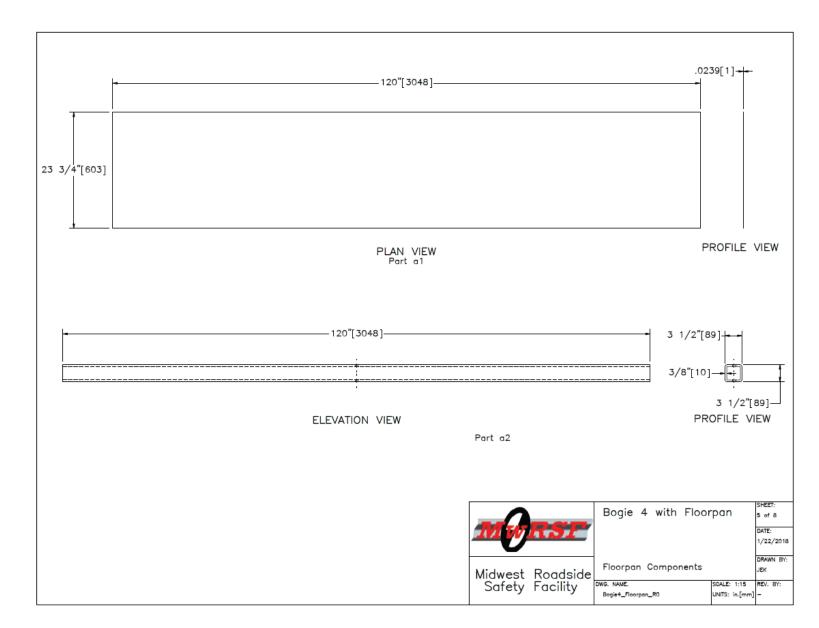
Floor Pan Components, Test Nos. MWPFP-22 through MWPFP-26
